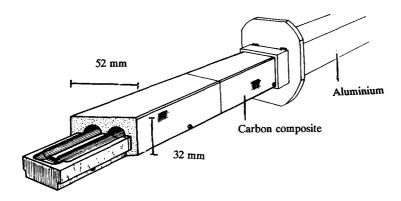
Irradiation end of the CAFIA, showing interlocking Aerolor bricks, aluminium support tube and, in partly cutaway section, the irradiation position with transfer and exhaust channels
